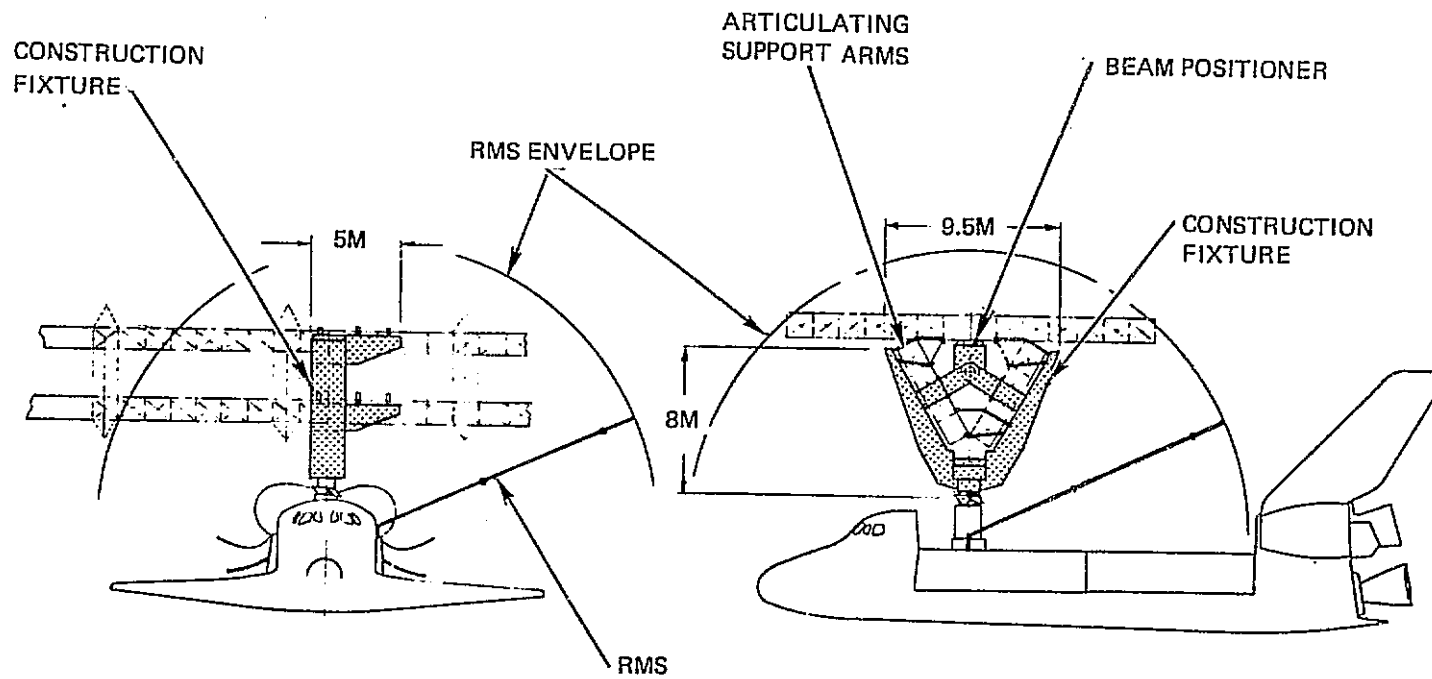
Space Fabricated Tri-Beam Construction Fixture
